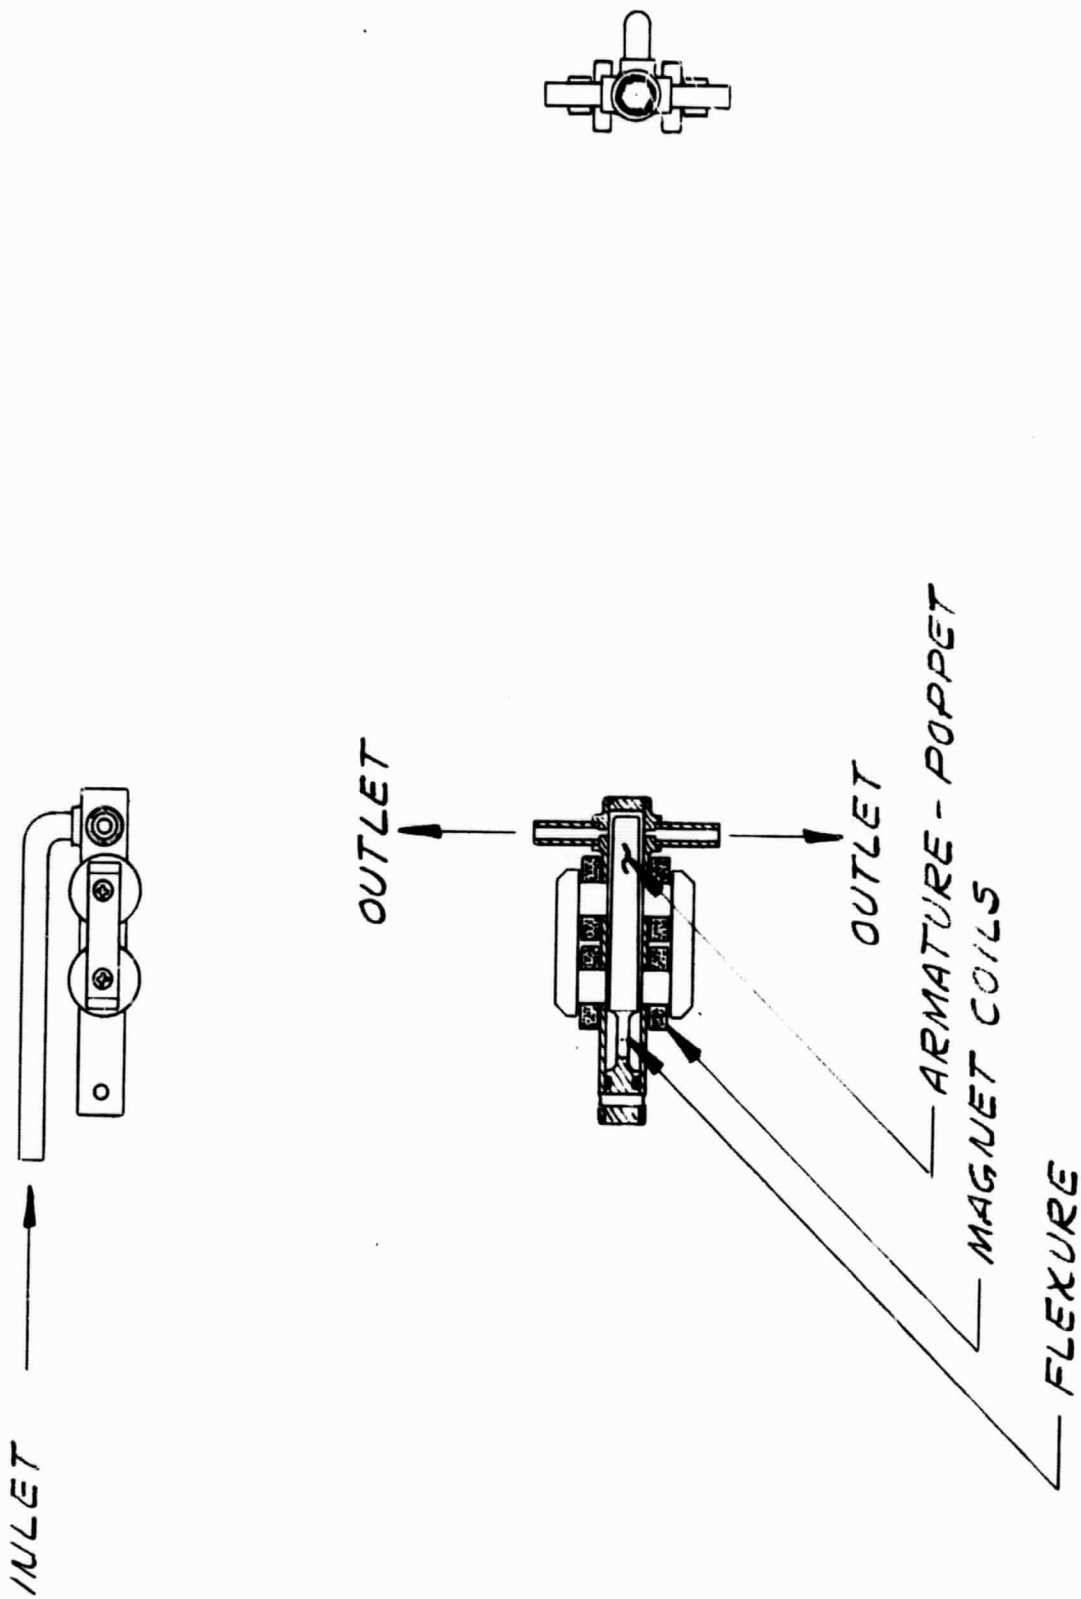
MECHANICAL DIVERSION VALVE DESIGN
